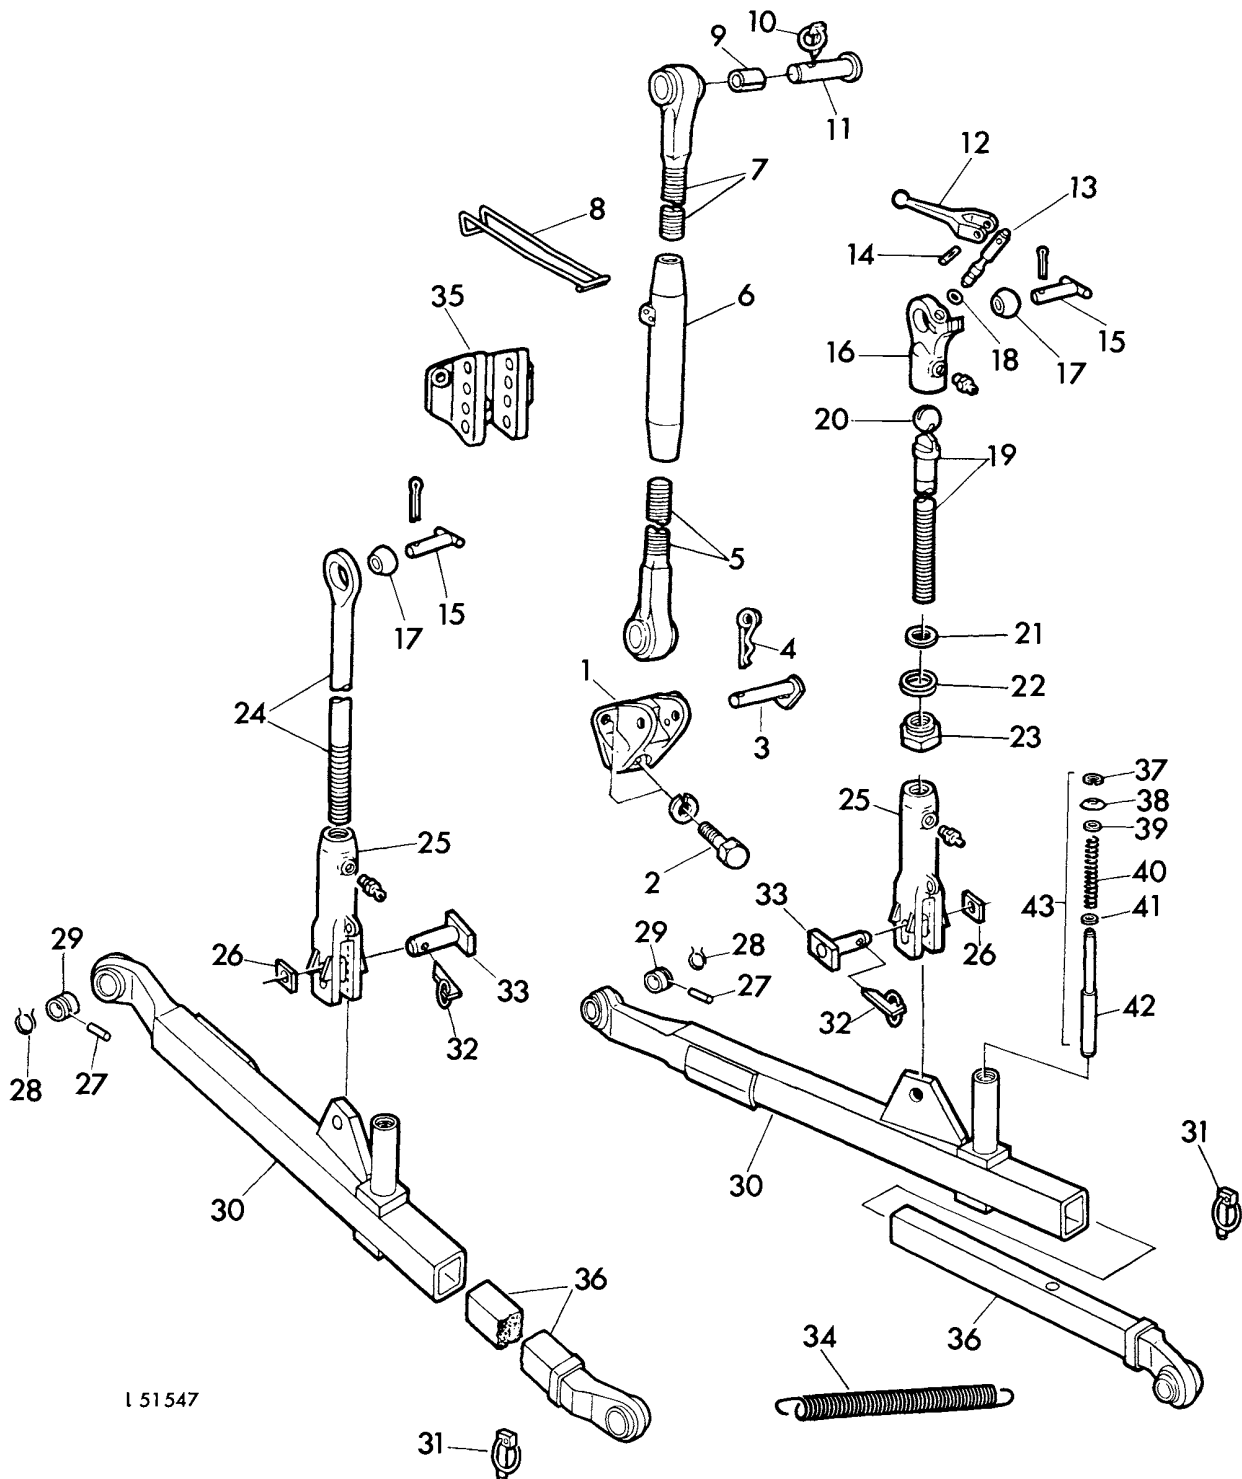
Exploded View of 3-Point Hitch (Cat. II)
